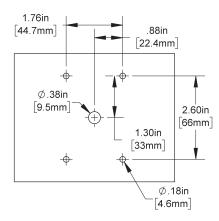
BAPI-Box Crossover Enclosure Mounting Holes
